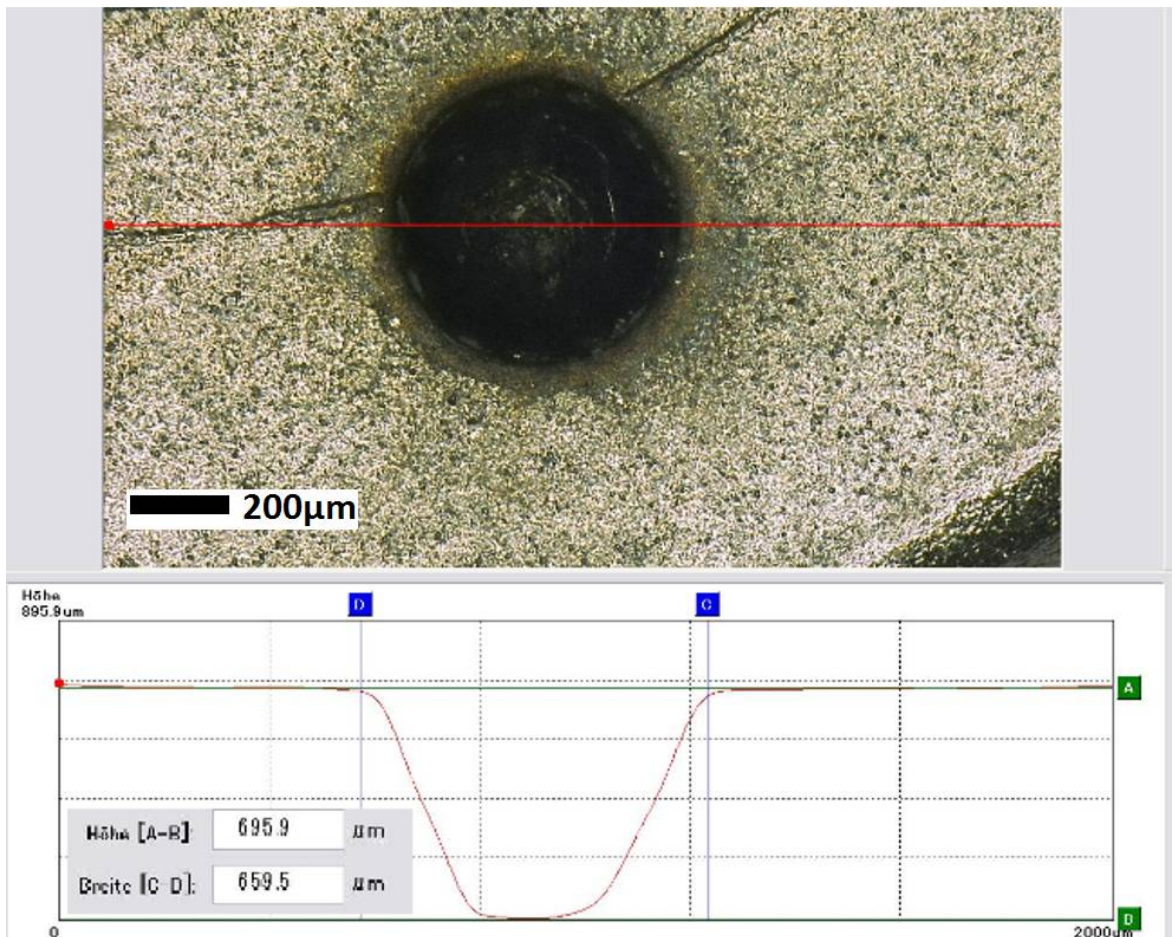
Picture and profile of a hole machined in a fuel injector with the sidewalls of the tool non-insulated.
